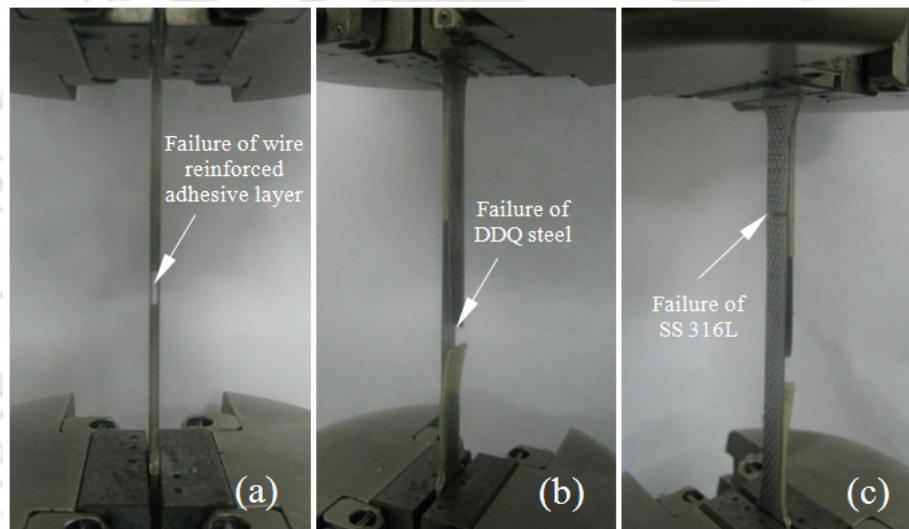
Failure pattern of wire reinforced adhesive bonded sheets during tensile test: (a) failure of adhesive layer, (b) failure of DDQ steel, and (c) failure of SS 316L
